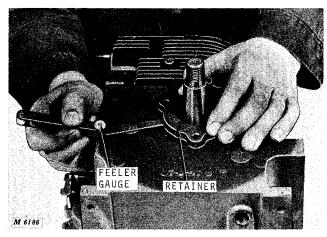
Checking Gap Between Cylinder Block and Retainer
